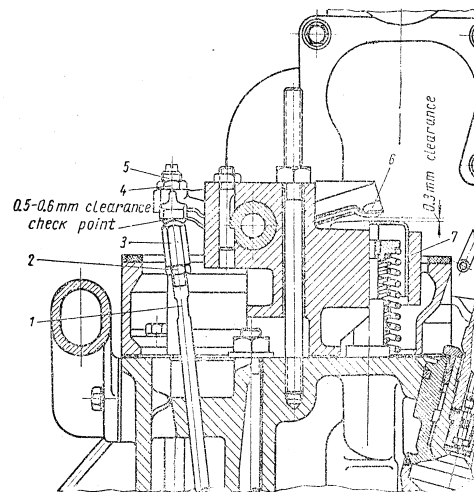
Valve Clearance and Diesel Engine Decompressor Mechanism Adjustment:
